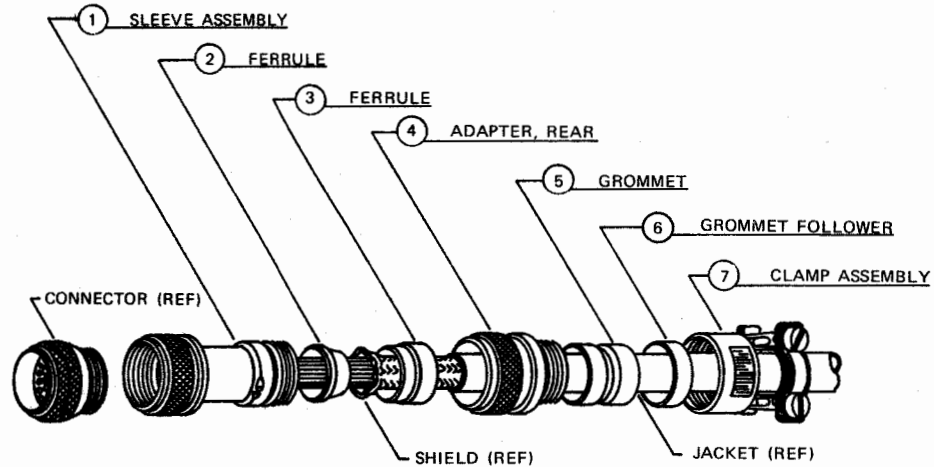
Style 1 - Type A Shield Environmental Backshell Assembly Breakdown
